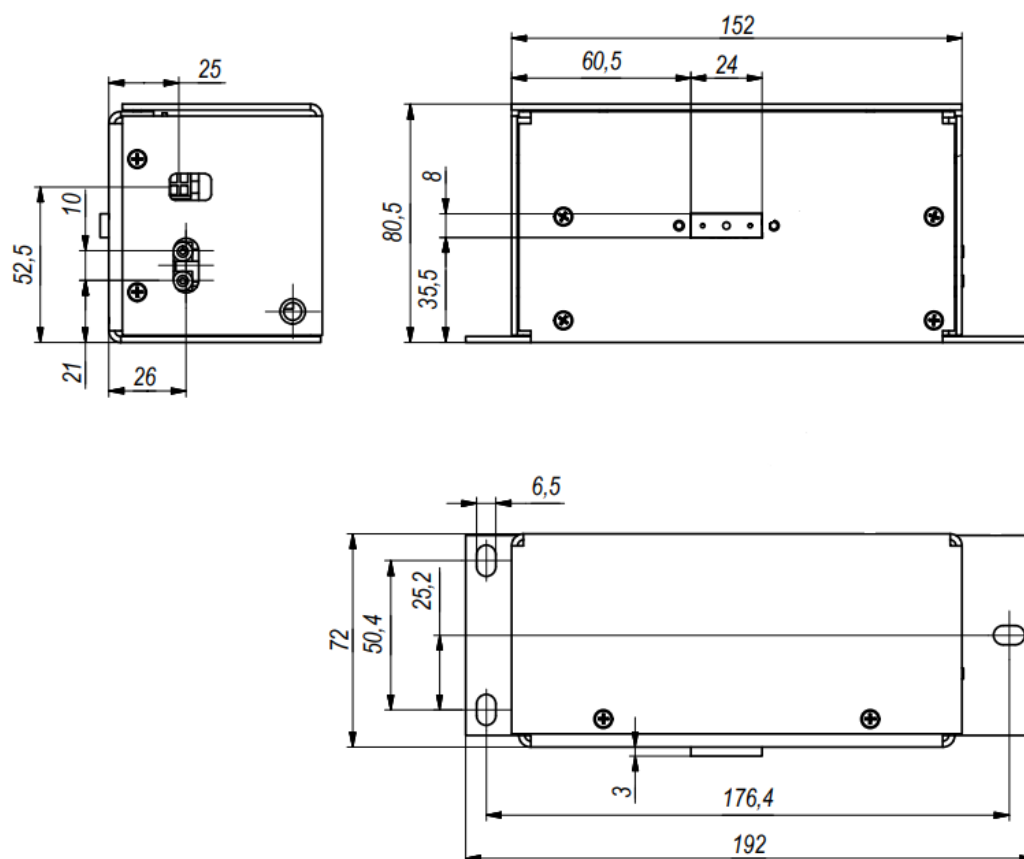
Outline drawing and dimensions of the driver without HV supply
